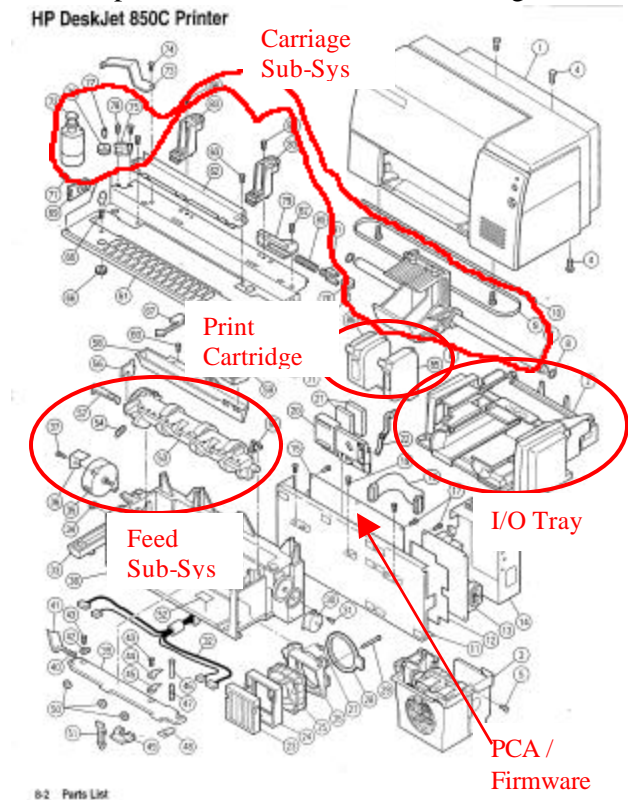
Exploded view of inkjet printer indicating component sub-systems
